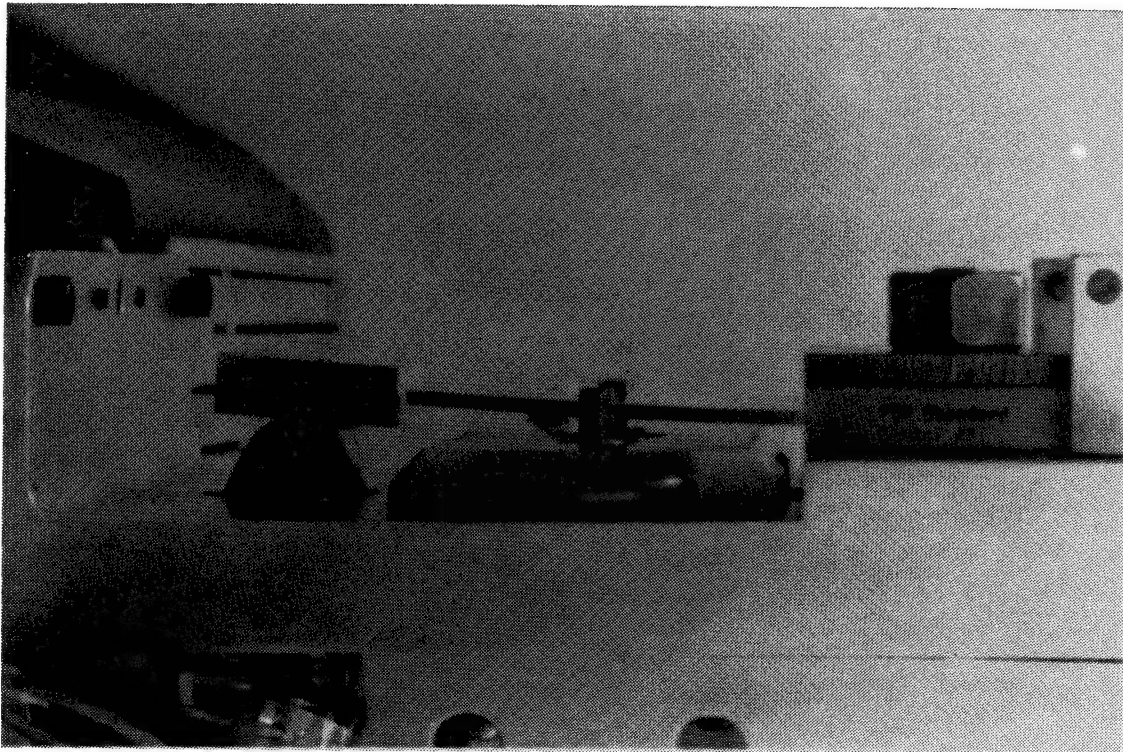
Side view of face of fixture with aluminum calibration beam installed.
